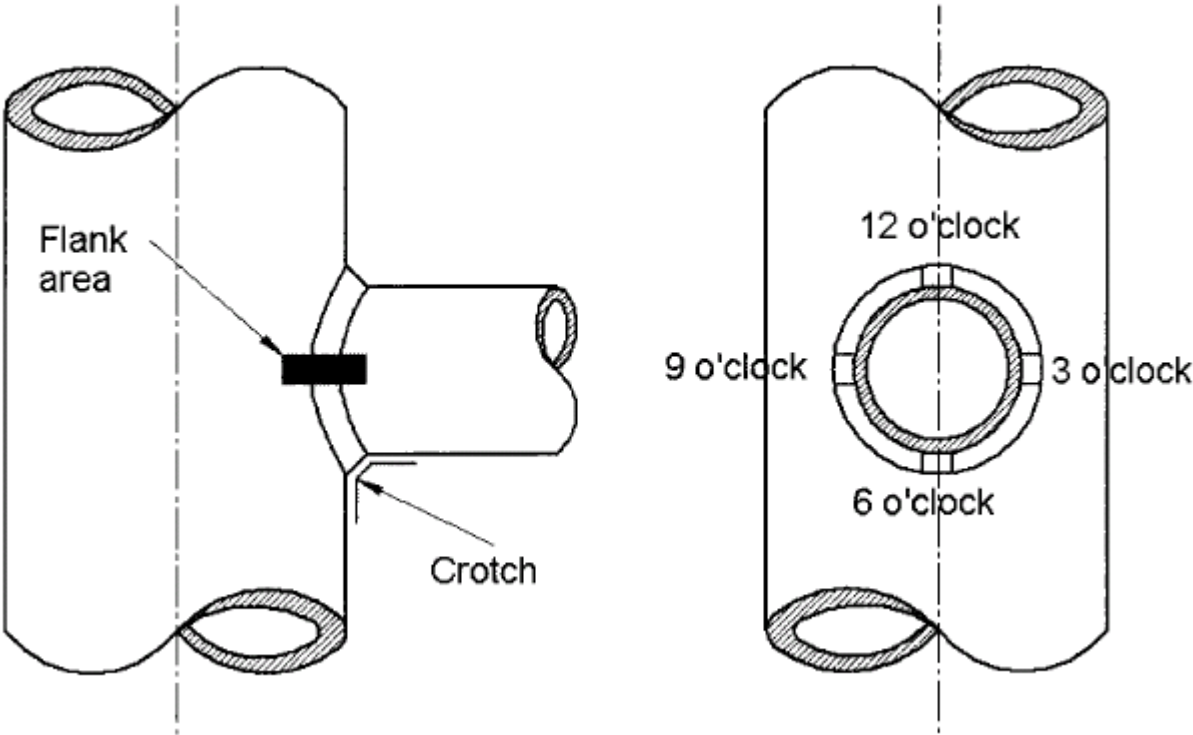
Typical Branch, Stub & Attachment Weld positions to be replicated.
